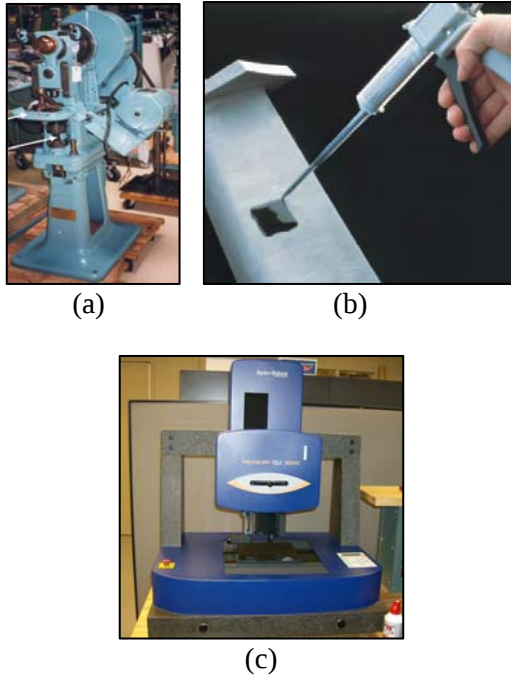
Establishment of new methodology to quantify tool wear; (a) compaction machine with die for wear measurement, (b) RepliSet (silicon rubber and shot gun), and (c) TalySurf profilometer for surface measurement.
